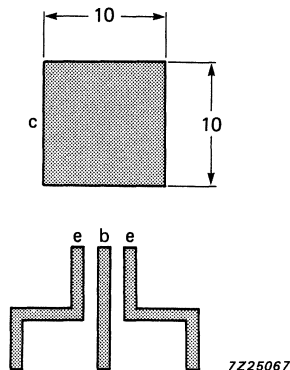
Single-sided 35 μm Cu-clad epoxy fibreglass printed circuit board; thickness 1.5 mm; tracks fully tin plated; Cu area shown shaded. (Dimensions in mm).
